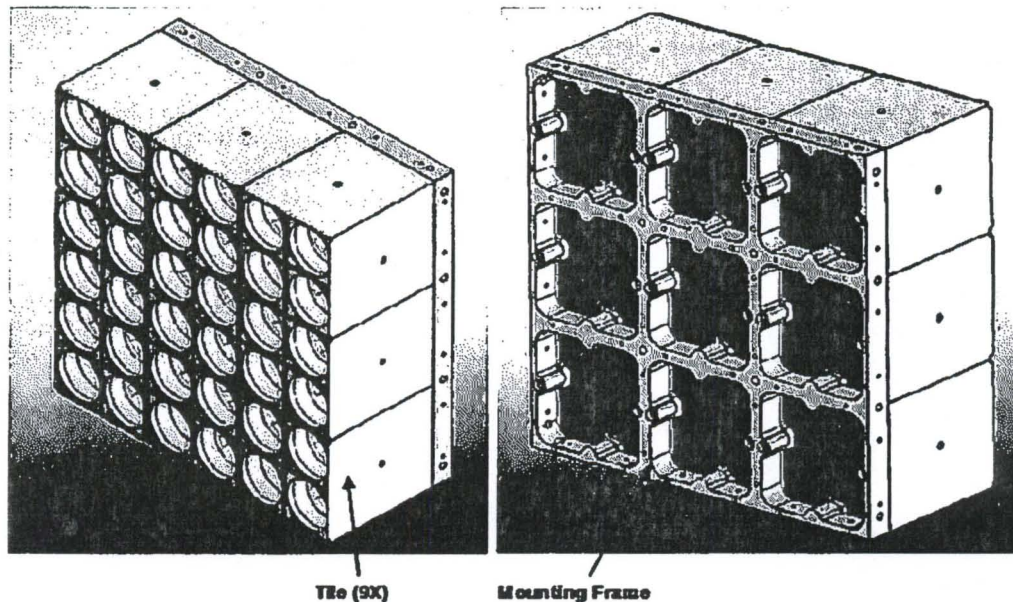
Nine tiles mounted to high precision mounting frame, completed SAIP prototype.
